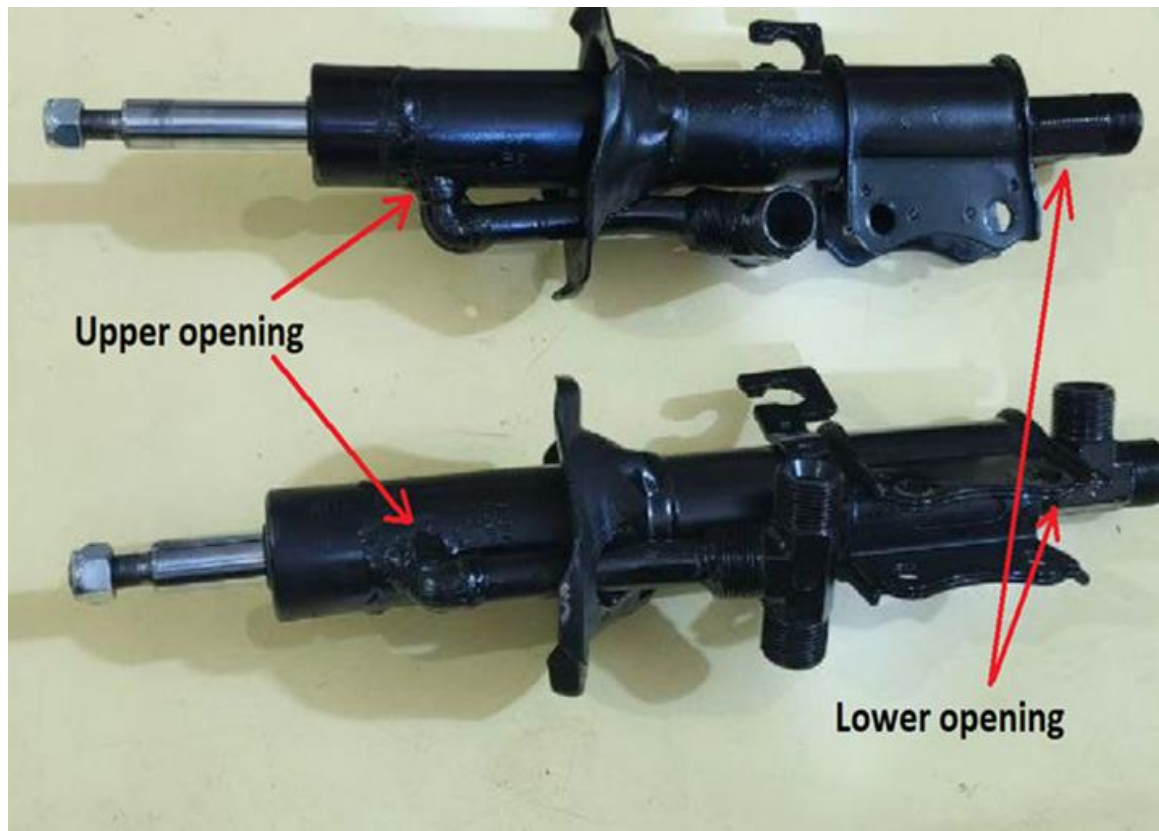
Two dampers with openings faces the top and bottom of the internal damper piston
